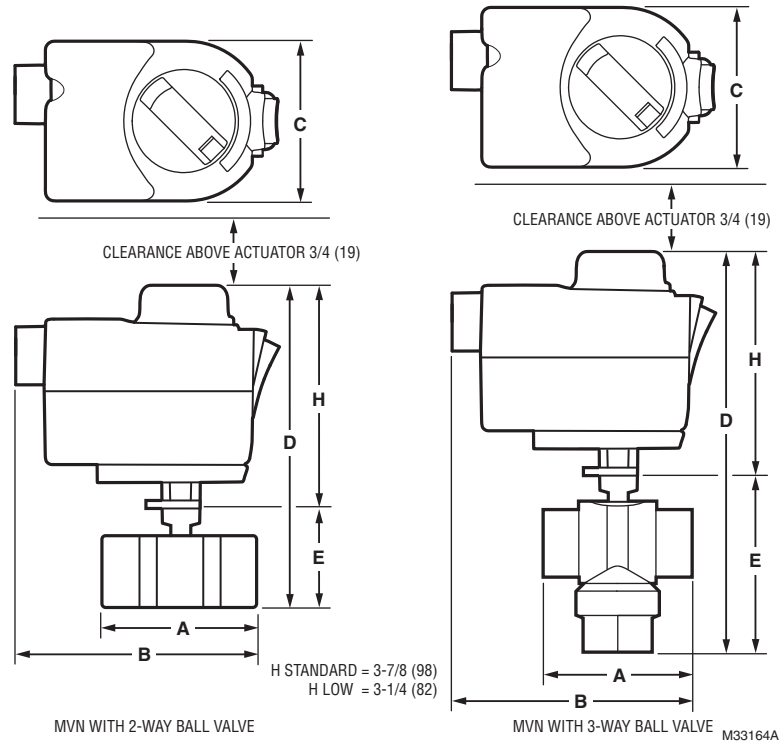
MVN with 2-way and 3-way ball valve dimensions in inches (millimeters). See also charts below.
